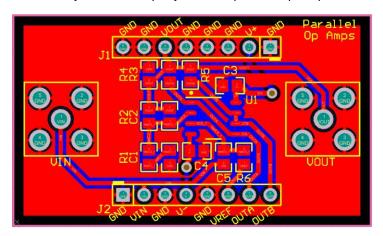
Parallel Op-Amp Top Layer PCB Layout
